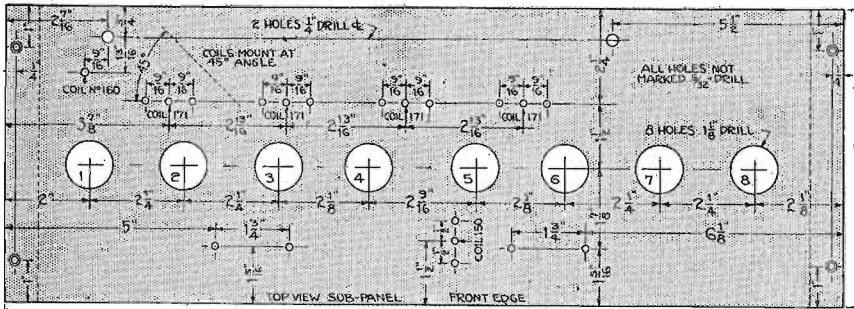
Sub panel drilling layout. Note wooden panel supports.
